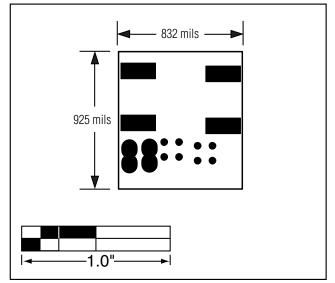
MAX2648 EV Kit PC Board Layout—Bottom Side Soldermask
